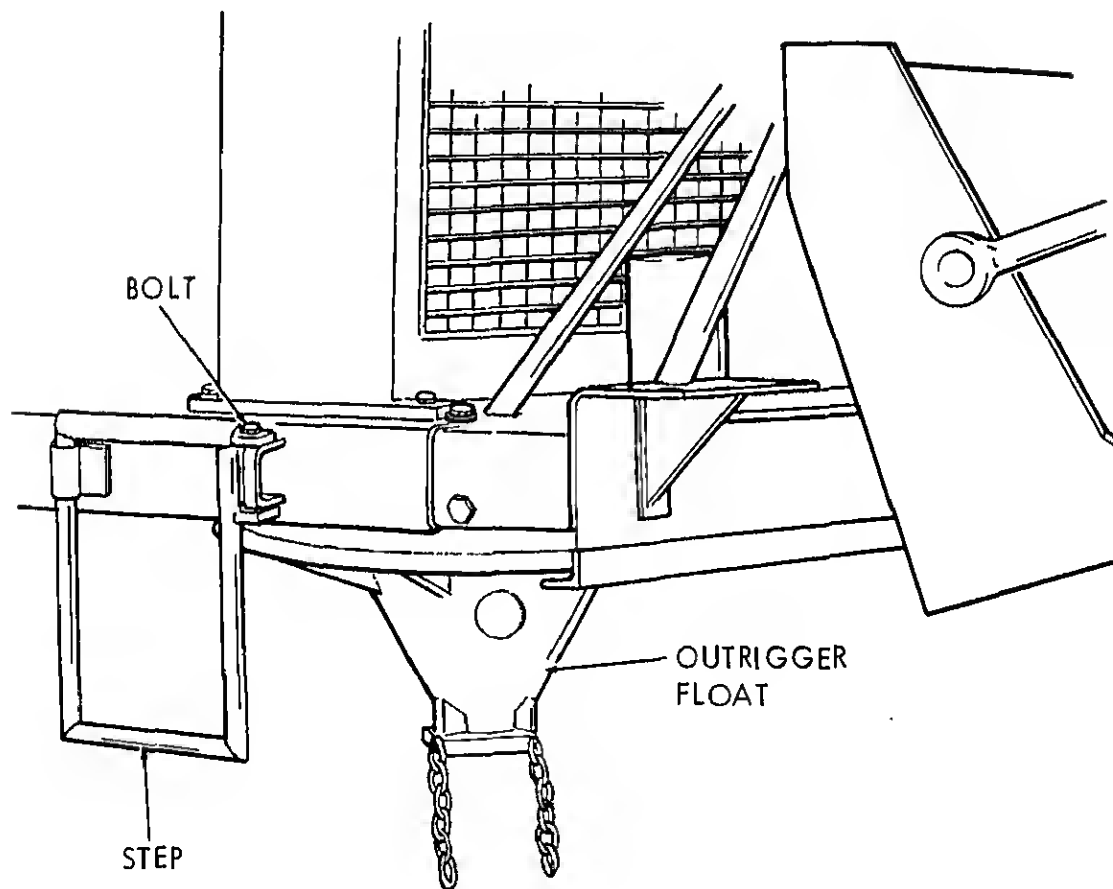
Stowed outrigger floats, removal and installation (sheet 1 of 2).
